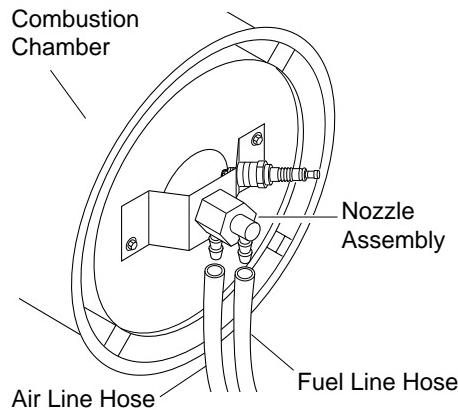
Removing Air and Fuel Line Hoses, 35 Model
